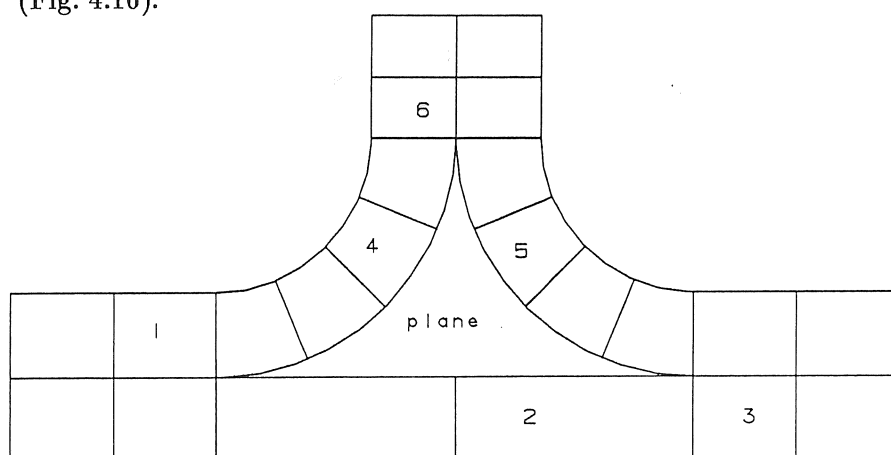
CAD drawing of the T-part, divided into individual surfaces of revolution.
